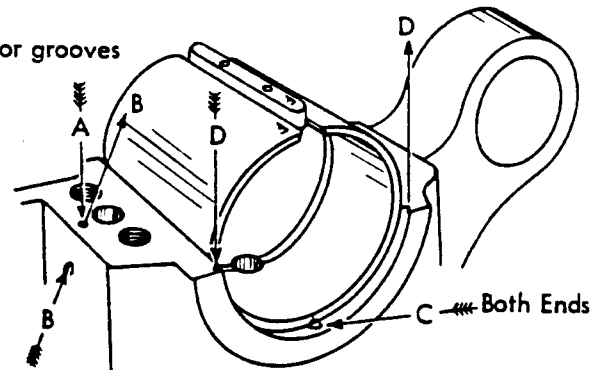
Run pipe cleaner through oil breather holes at A and B also oil return hole at C and groove D to clean out any obstruction
